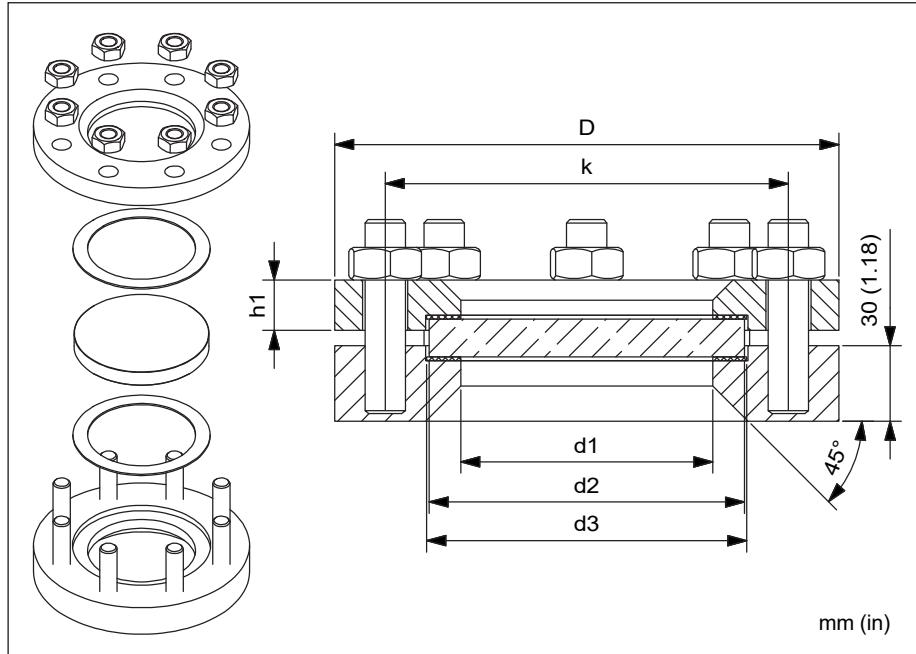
Dimensions of sight glass fitting for welding on/in for processes up to 1 MPa
